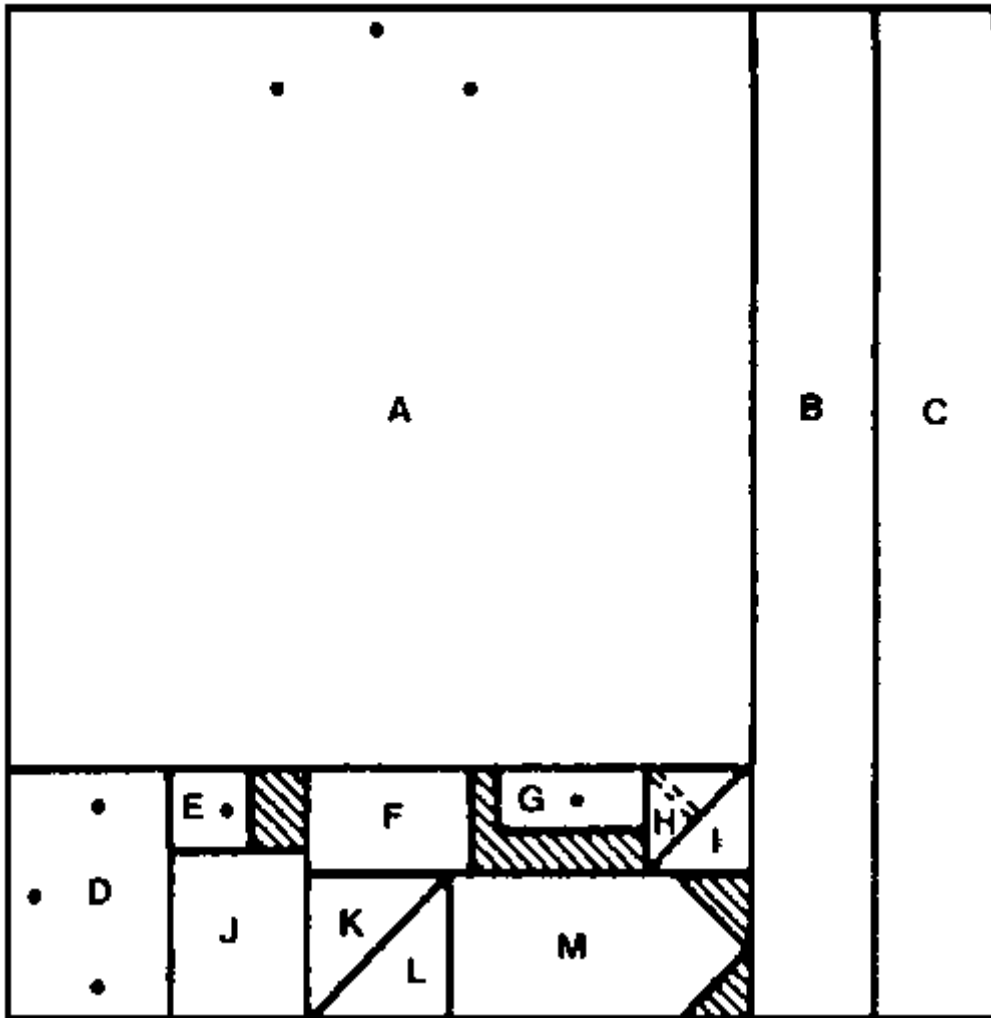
Cutting layout - 3/4" plywood, 24" x 24". Code letters are a guide to assembly.
